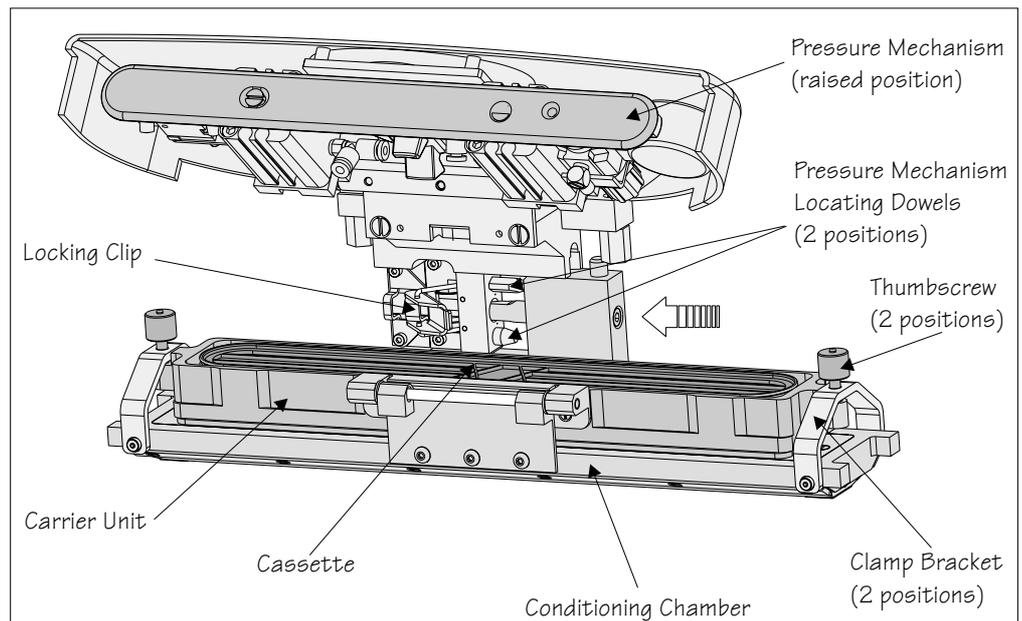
Transfer Head to Pressure Mechanism Interface
